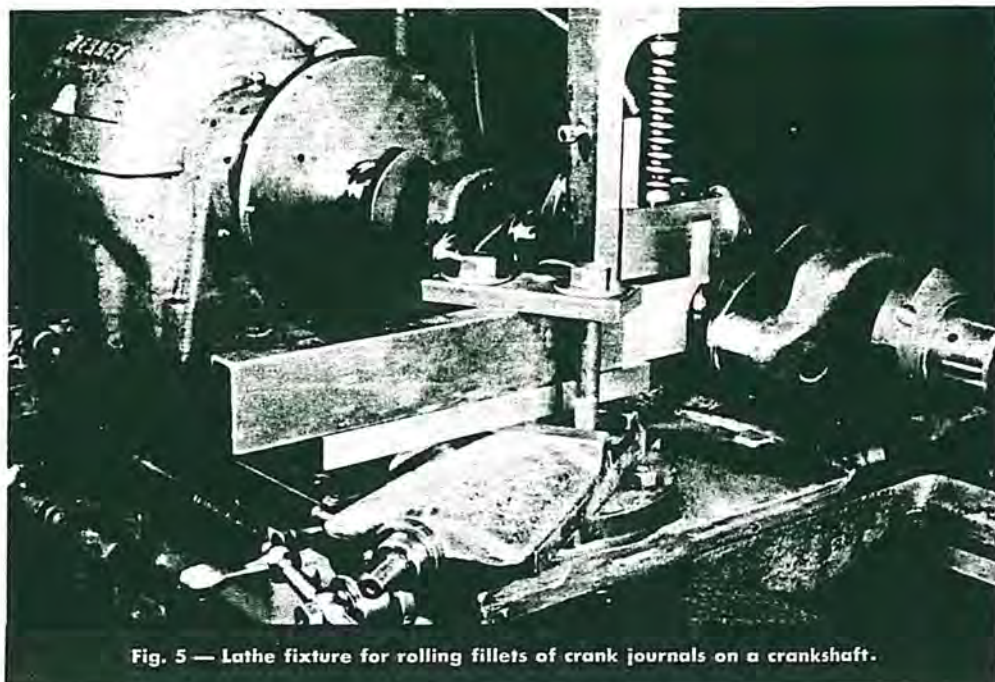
Lathe fixture for rolling fillets of crank journals on a crankshaft.
